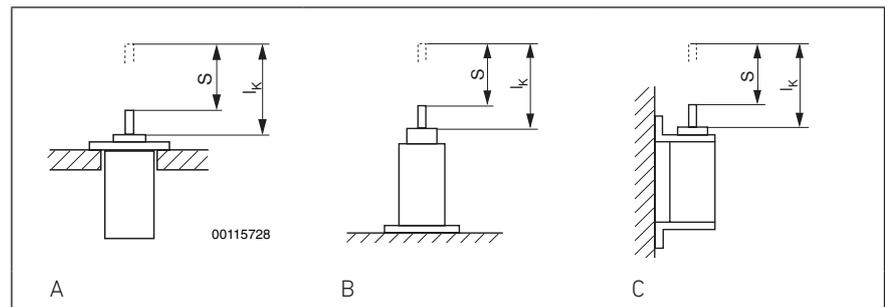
Mounting application examples: (A) Front flange mounting; (B) Rear flange mounting; (C) Foot mounting
